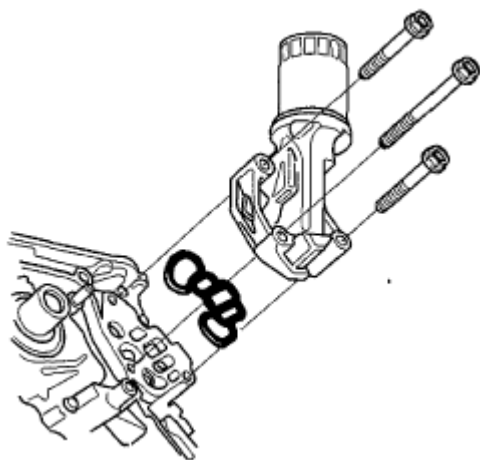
Identifying Oil Filter Base/Oil Filter Assembly
